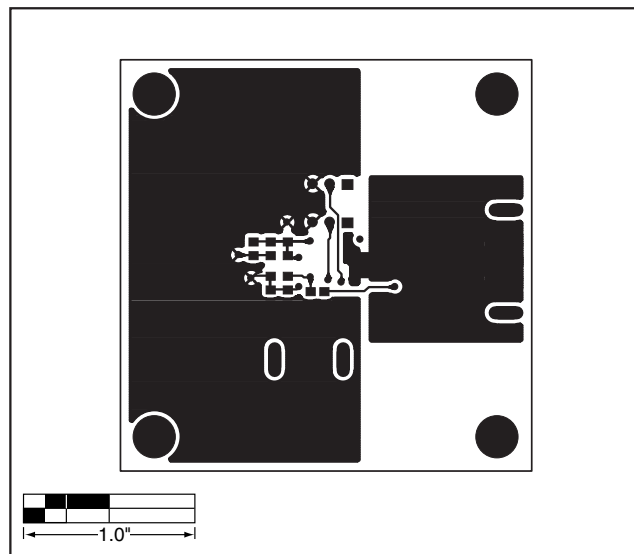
MAX1760 EV Kit PC Board Layout—Solder Side
